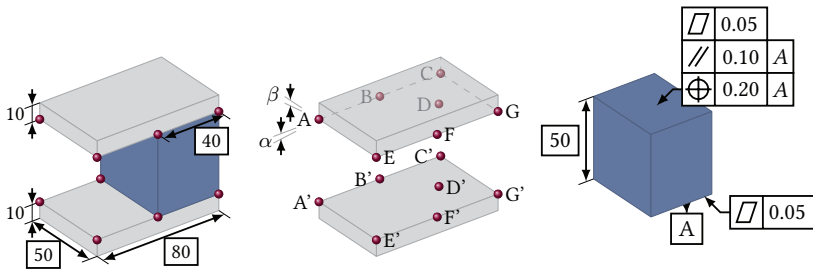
Tolerance Stack-Up of two ideal Plates and a specified Cube
